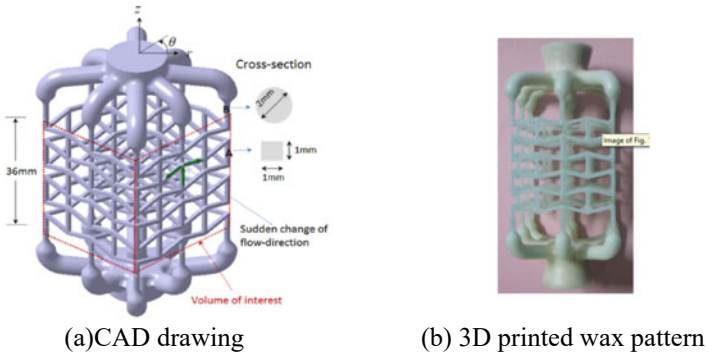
Investment casting of 3D-printed cellular patterns [21]
